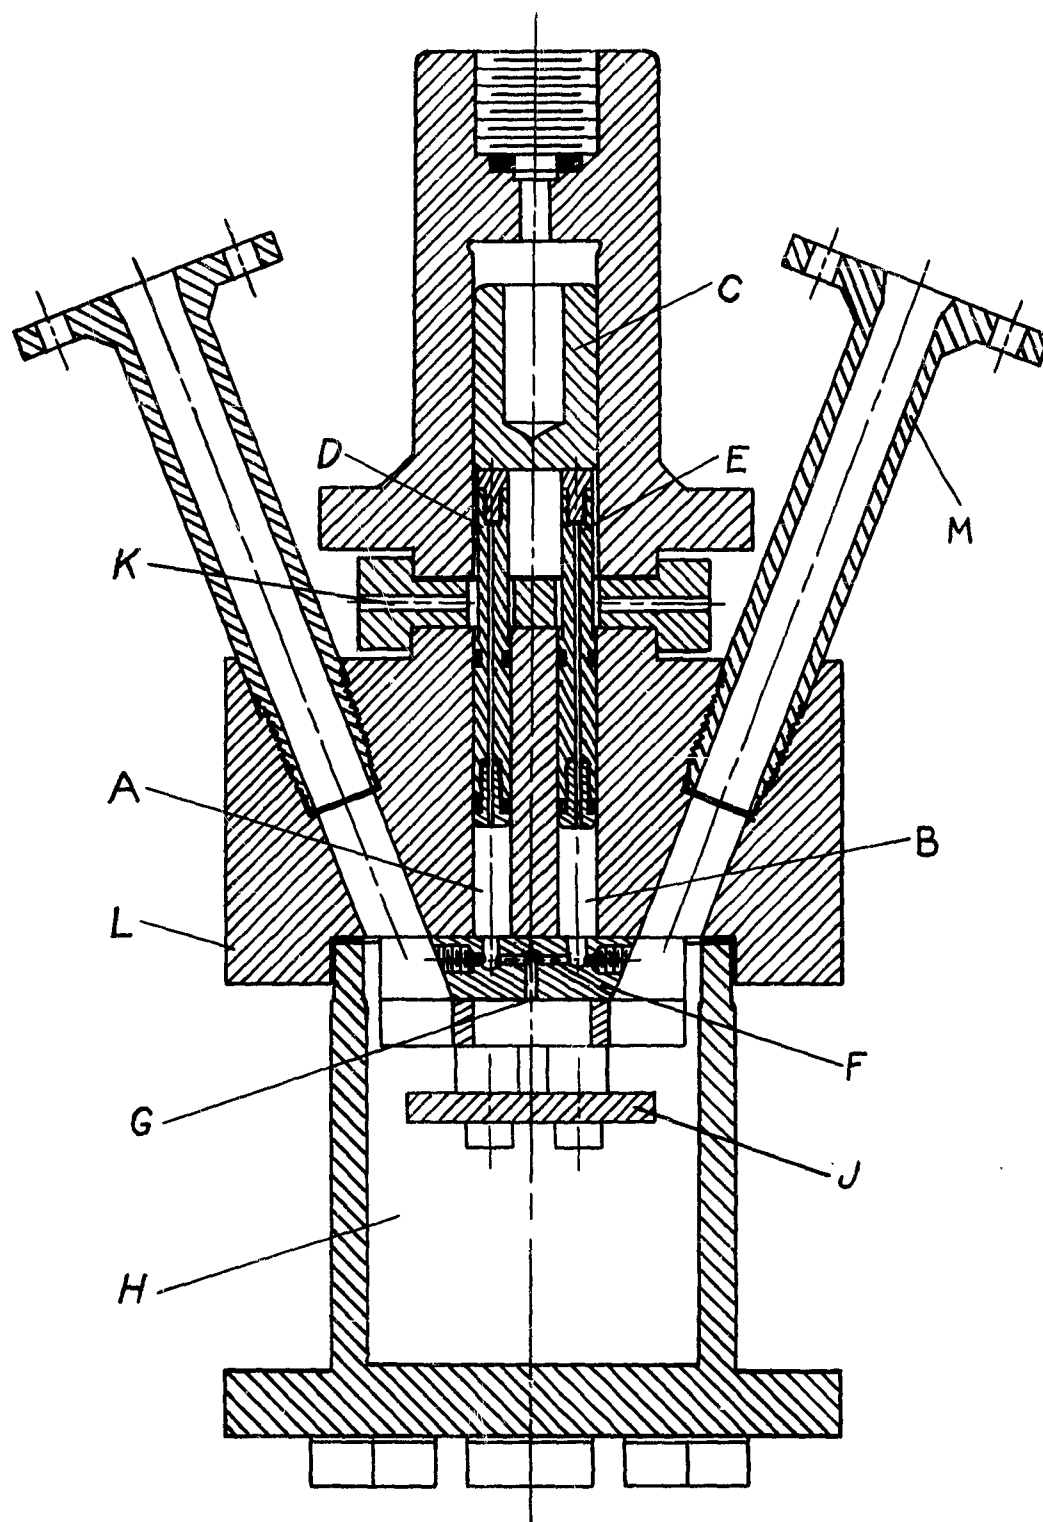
Cross-sectional Assembly Drawing of Reactor II.
